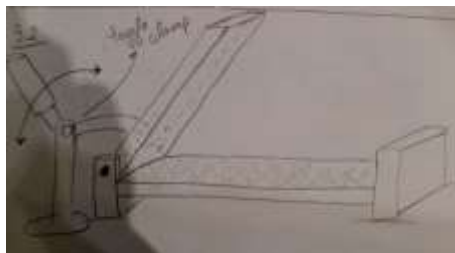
Flip-up clamping system controlled by a toggle clamp.
